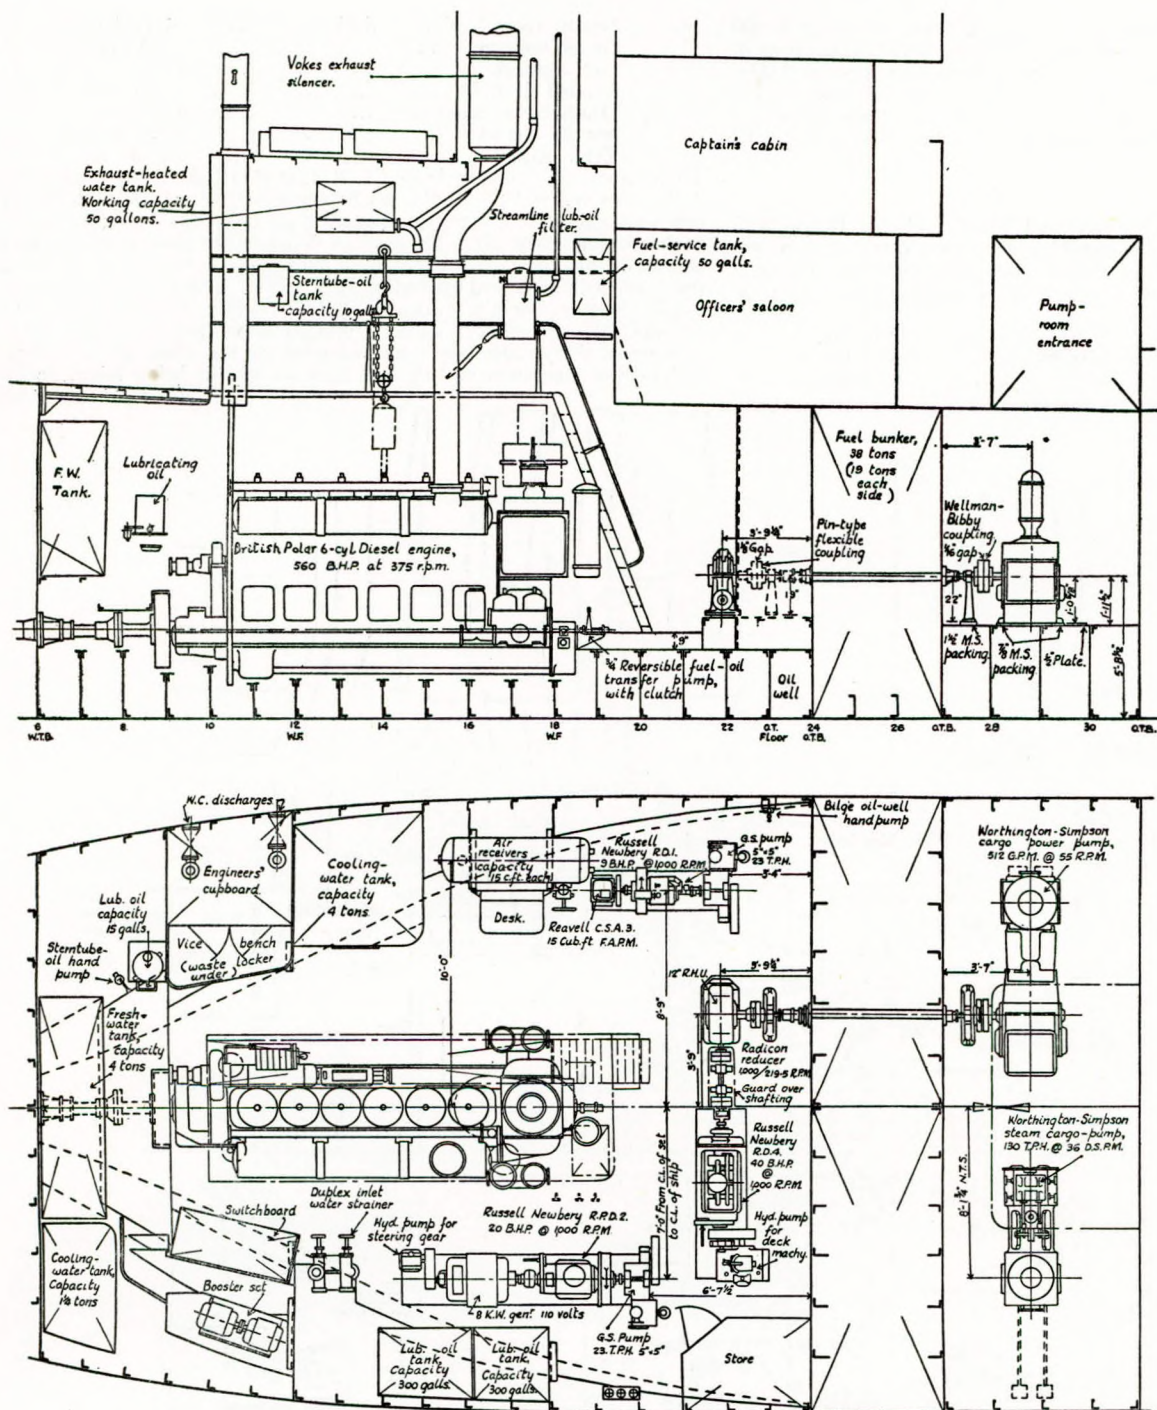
Machinery arrangement of the coasting oil-tank motorship "Ben Hebdon"
